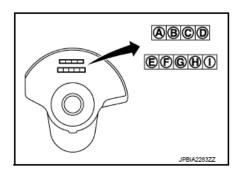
Identifying Bearing Housing And Cylinder Bore Grade Numbers Courtesy of NISSAN MOTOR CO., U.S.A.
